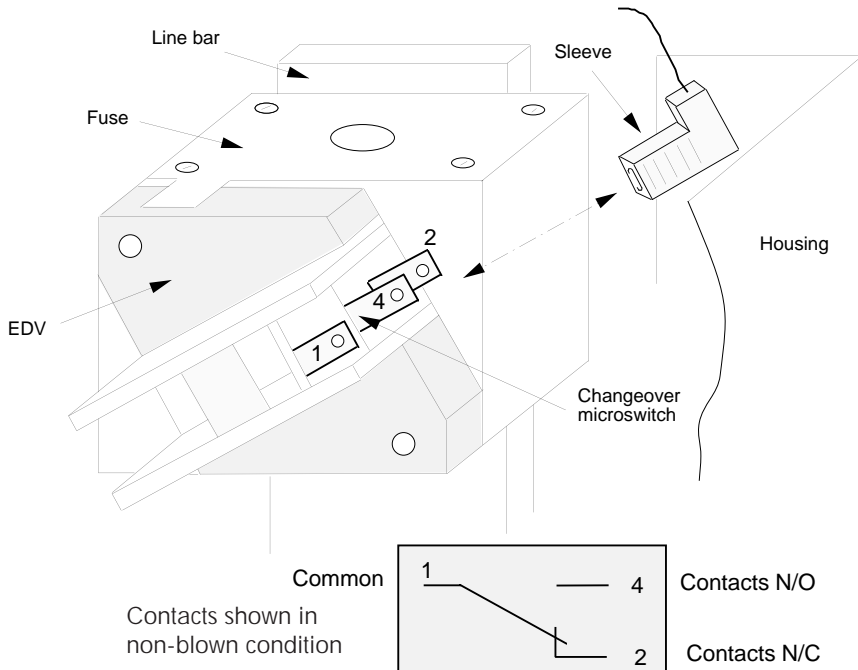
Use of ‘flag’ lugs and insulating sleeves to comply with electrical clearance distances
